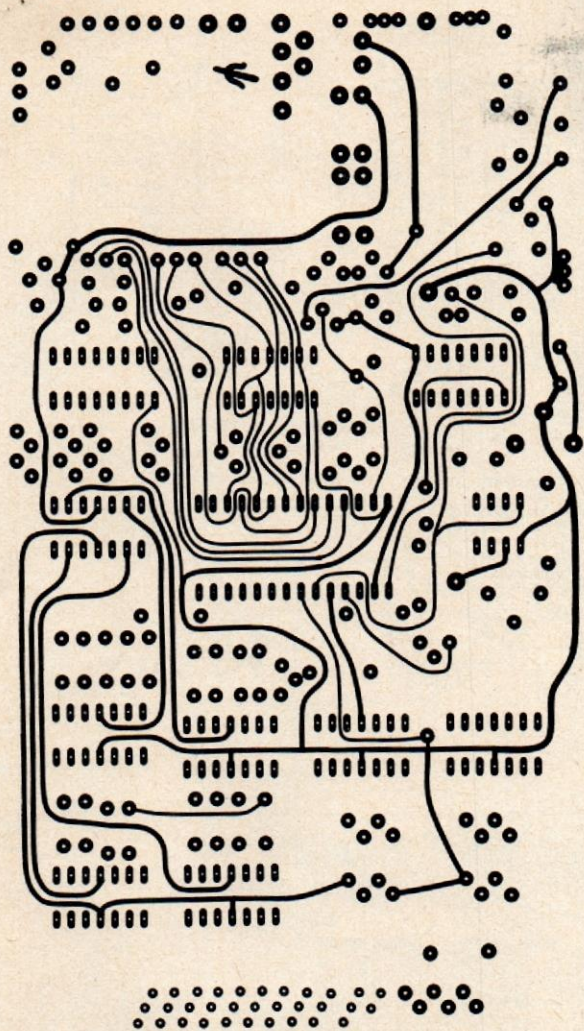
FOIL PATTERN of component side of double-sided clock board. Actual board measures 7 × 4 inches.
